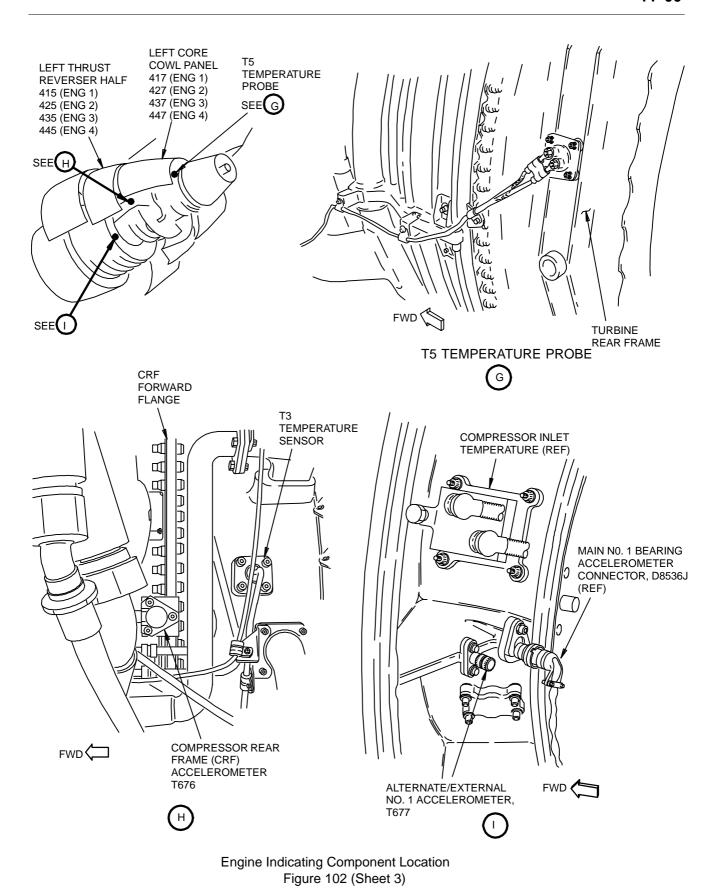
77-00 Engine Indication Component Location Fig. 102 (Sheet 3)
